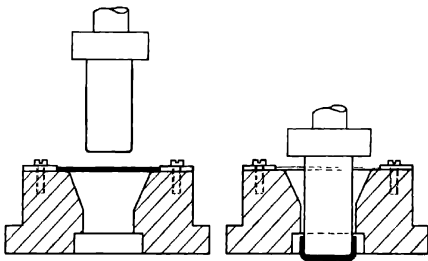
Simple-type drawing tool—forming shallow cup.
